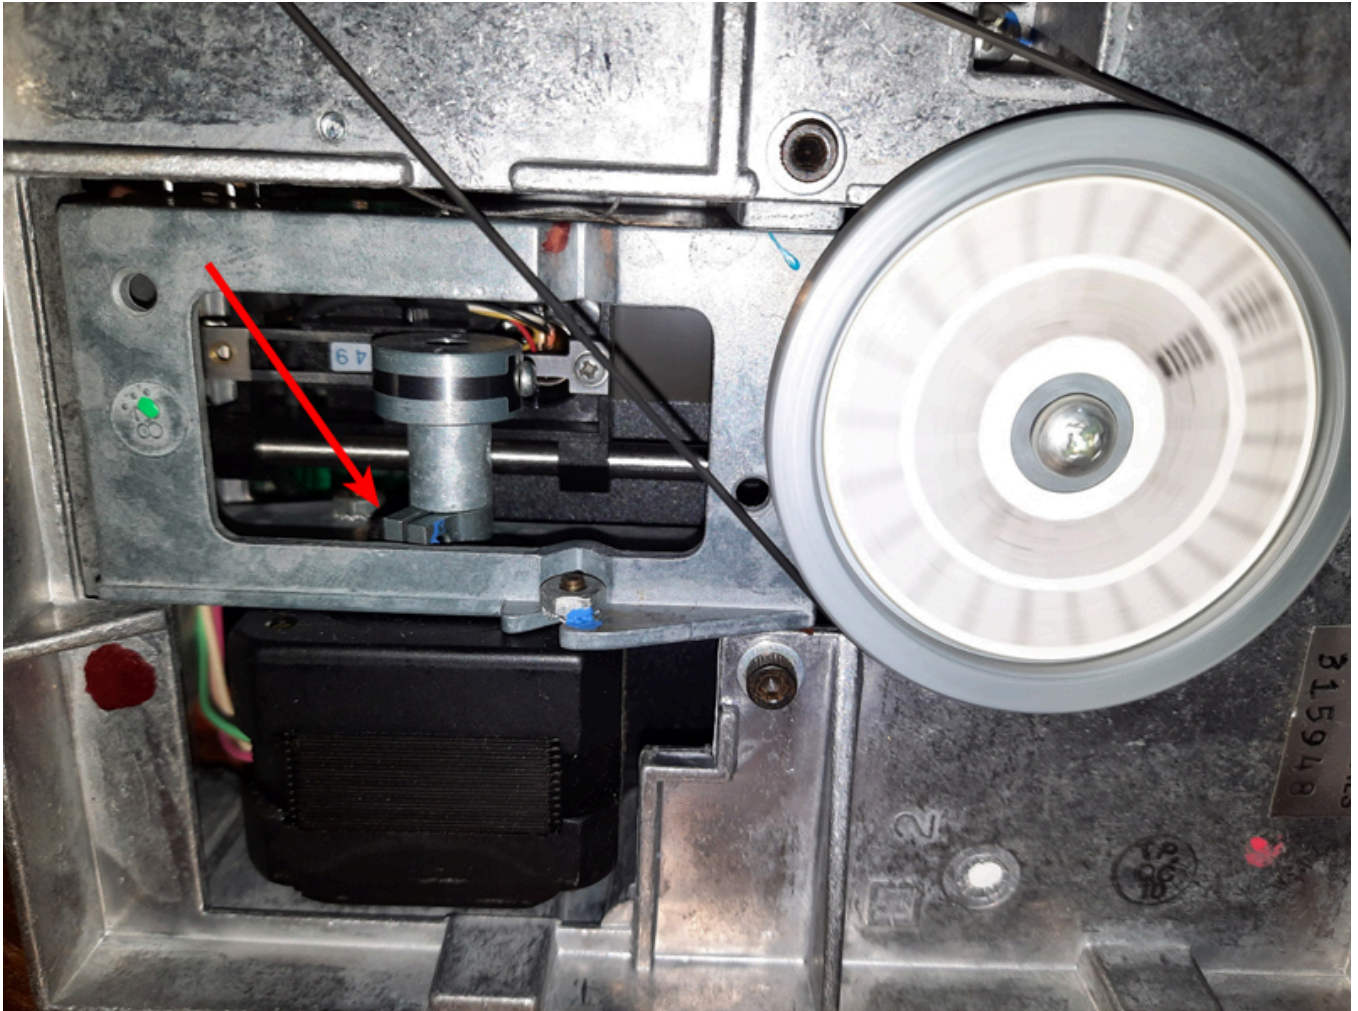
The stepper motor coupling showing the position of the clamp screw (hidden in photo)
